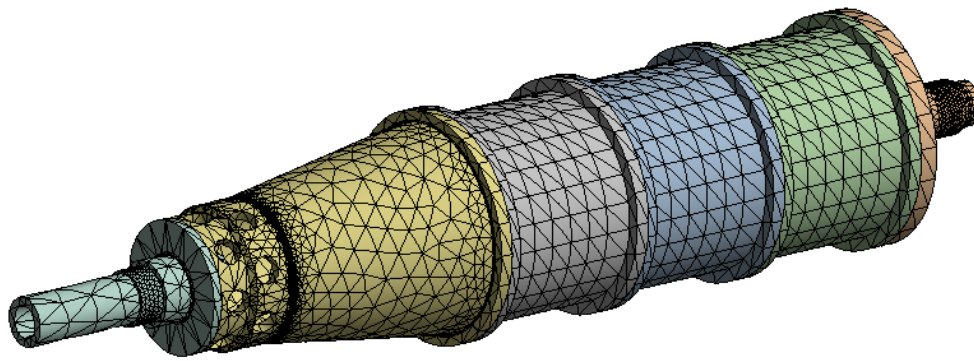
Meshed Dual rotor assembly with refinement at the bearing surfaces
